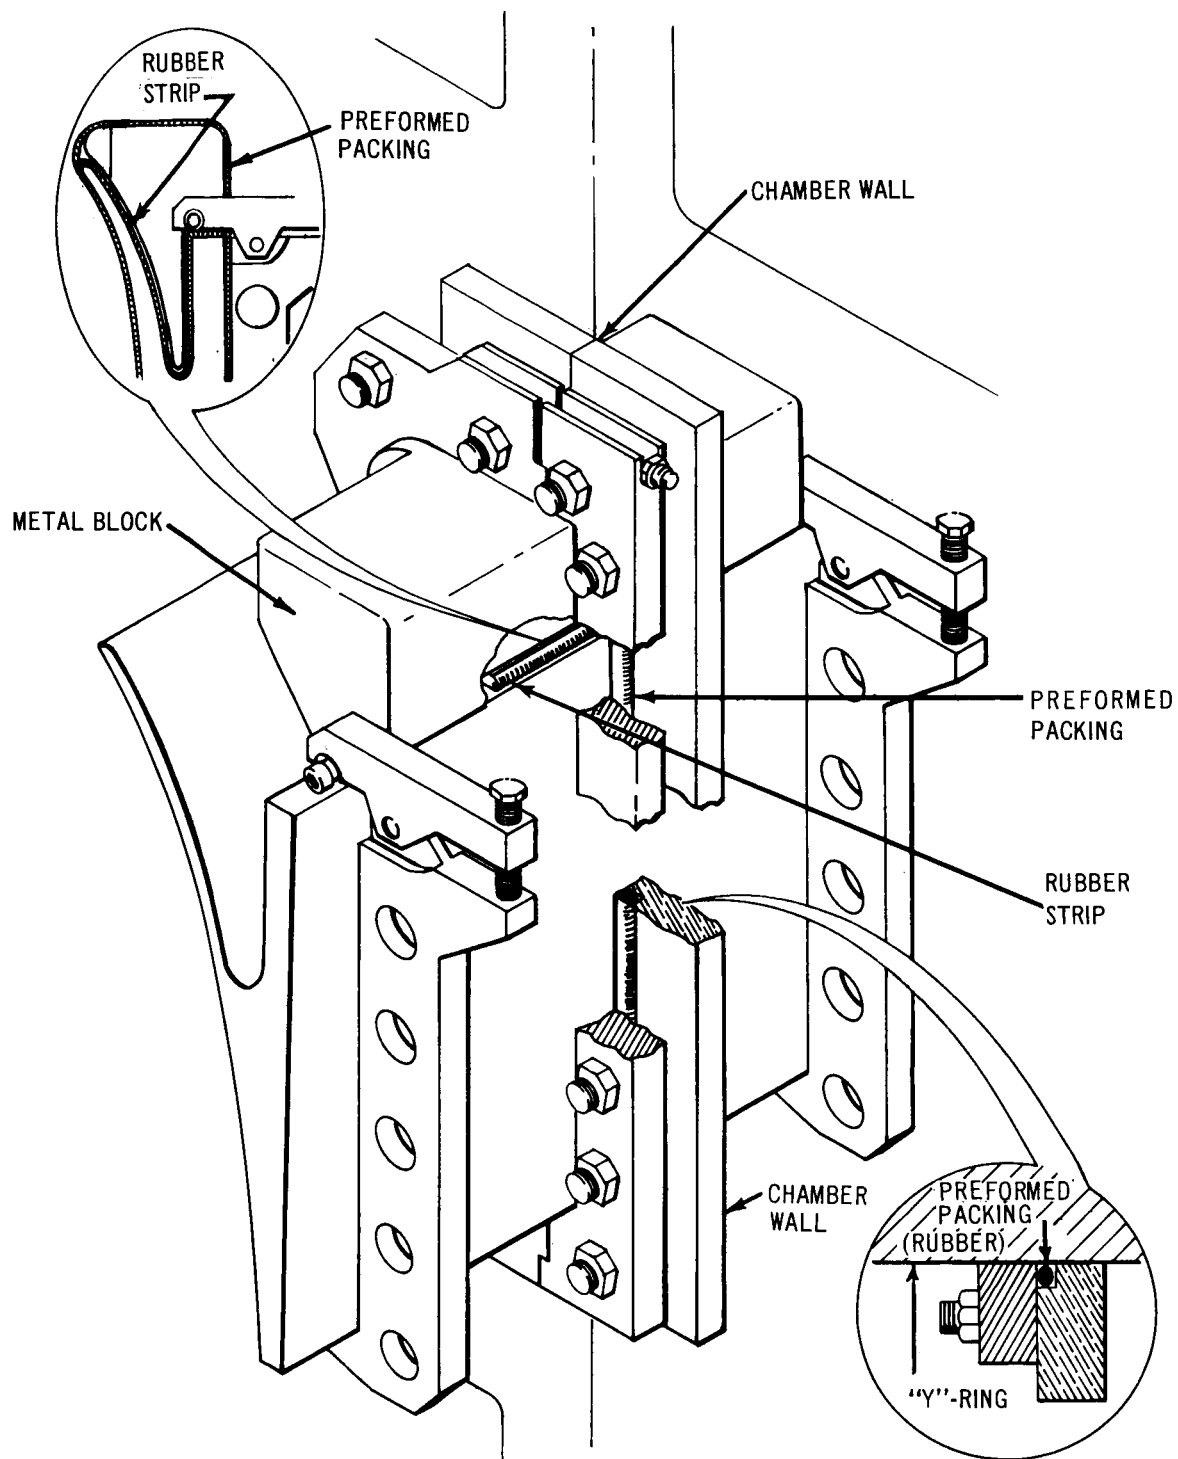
SEALING BETWEEN Y-RING AND VACUUM CHAMBER
